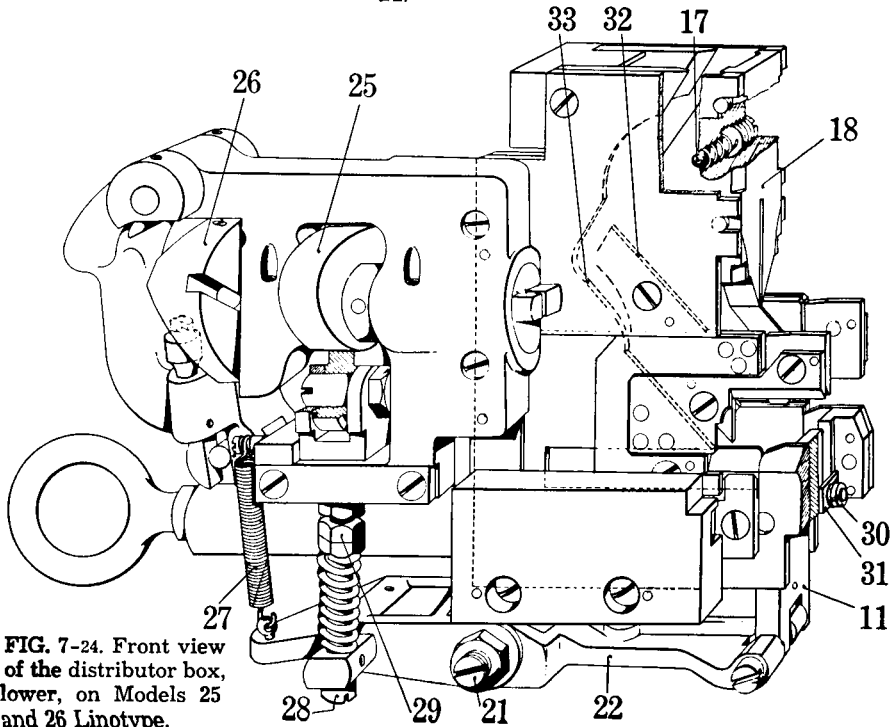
Front view of the distributor box, lower, on Models 25 and 26 Linotype.
